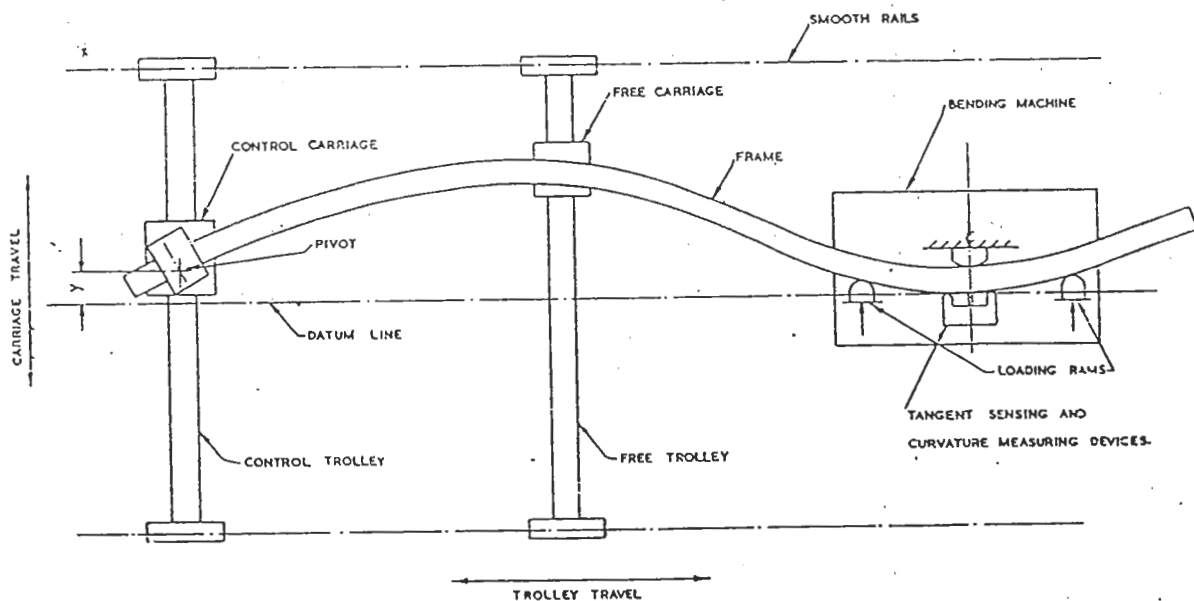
GENERAL LAYOUT OF THE MACHINE
